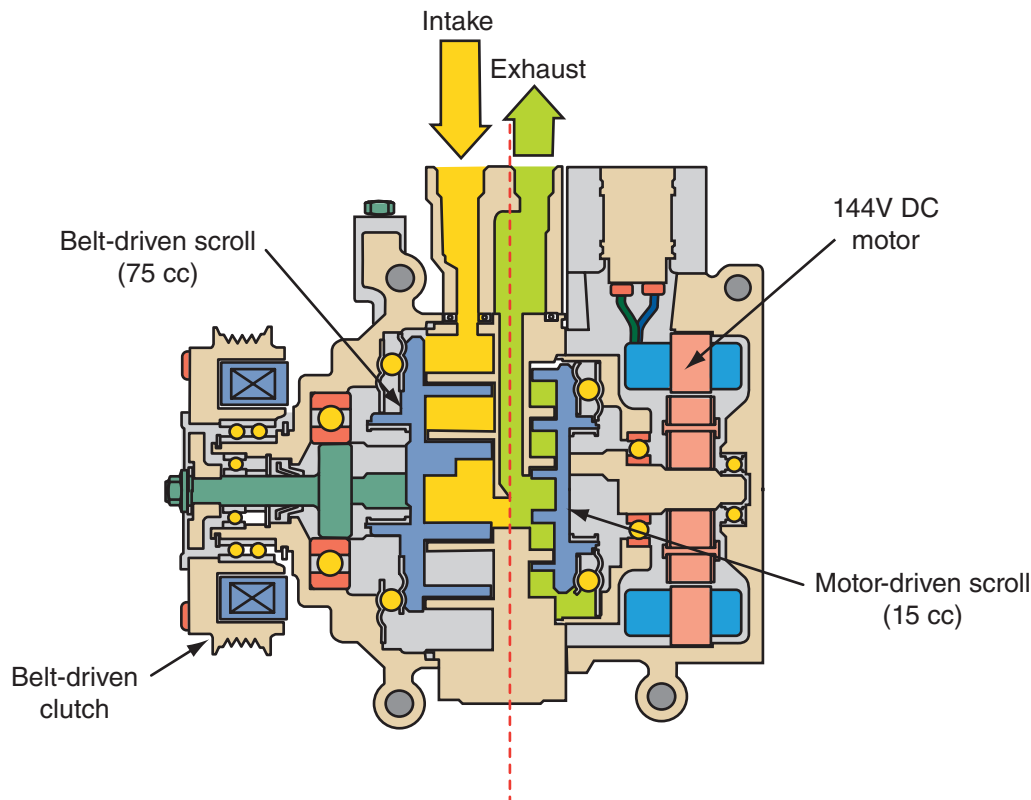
A dual-scroll A/C compressor powered by a drive belt and/or an electric motor.
